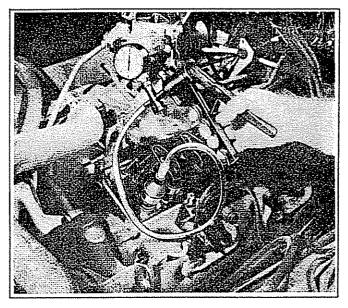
A2-21 — Checking Valve Stem Oil Seals — Small V-8
